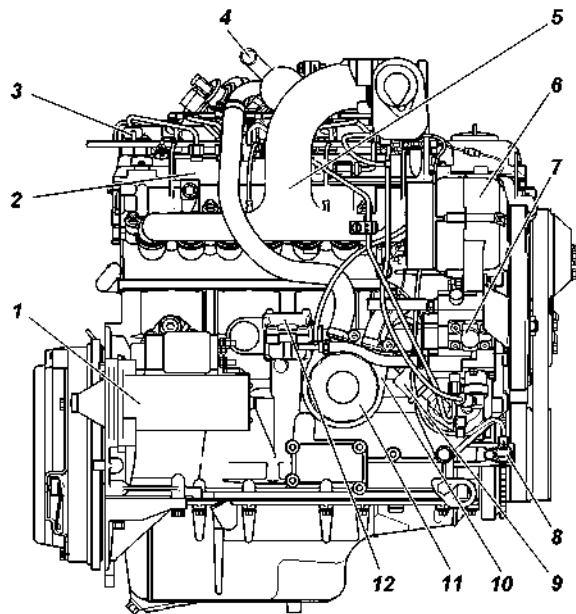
ZMZ-51432 engine (right-side view): 1 -starter; 2 –fuel rail; 3 - phase pickup; 4 - discharge tube of cooling fluid into the heater; 5 - inlet tube; 6 -generator; 7 - high-pressure fuel pump (HPFP); 8 – synchronization sensor; 9 - pressure sensor; 10 –liquid-oil heat exchanger; 11 -oil filter; 12 –lid of oil pump drive
